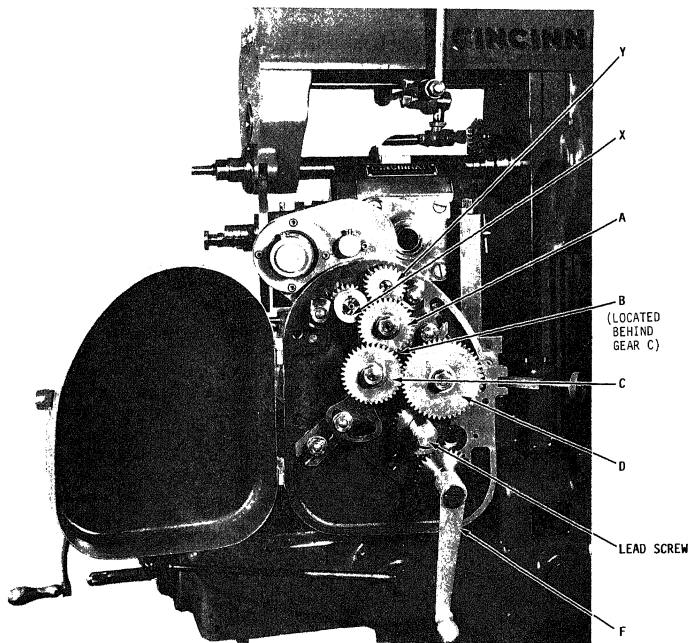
Standard universal dividing head driving mechanism connected to the dividing head, and showing location of change gear's A, B, C, and D.
